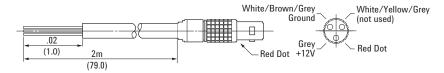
83006-60004 DC Bias Cable. Dimensions in meters and (inches).
